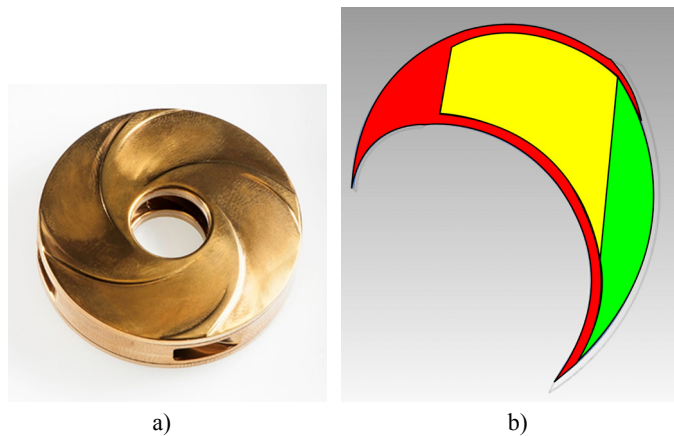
Hydraulic bearings construction: a) hydraulic bearings picture; b) hydraulic bearing blade areas: green – bearing inlet; yellow – bearing lifting surface; red – bridging surface
